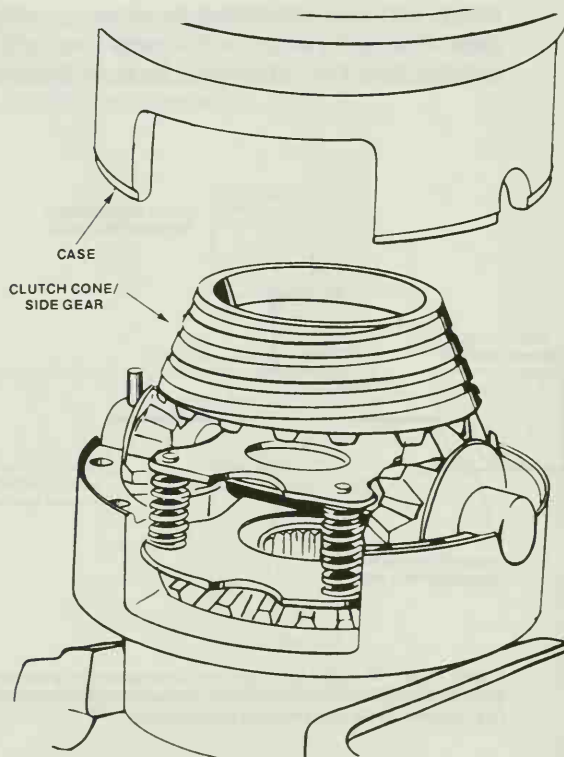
Installing the flange half of the case. (Pontiac Motor Division of General Motors Corporation)
